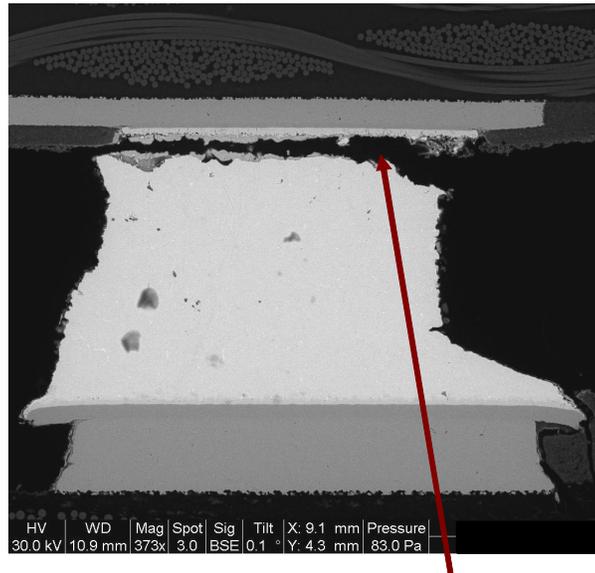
Lateral section of Sn based finish Sn3.5Ag solder Board2 – Package G (256 I/O BGA) (courtesy: CALCE)
